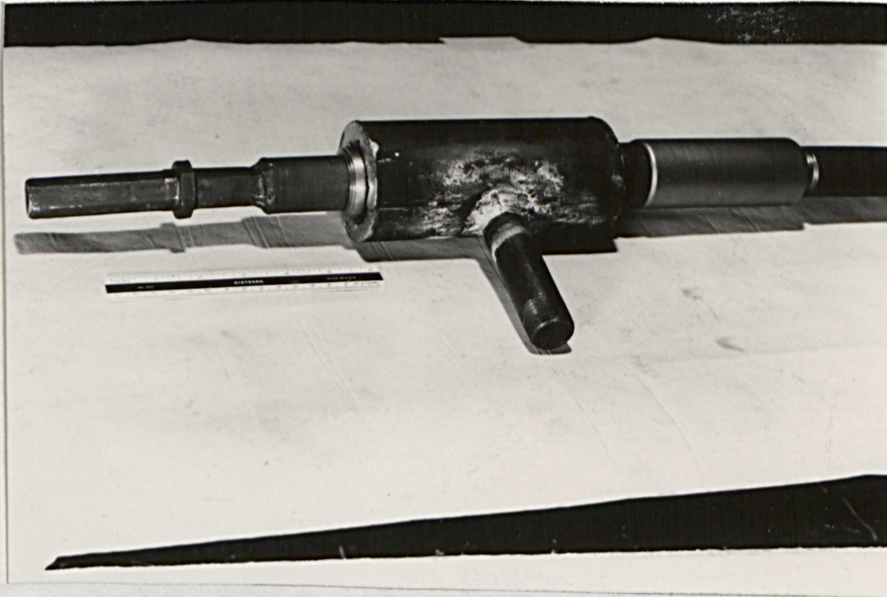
Assembled Swivel Coupled to Drill Steel by
